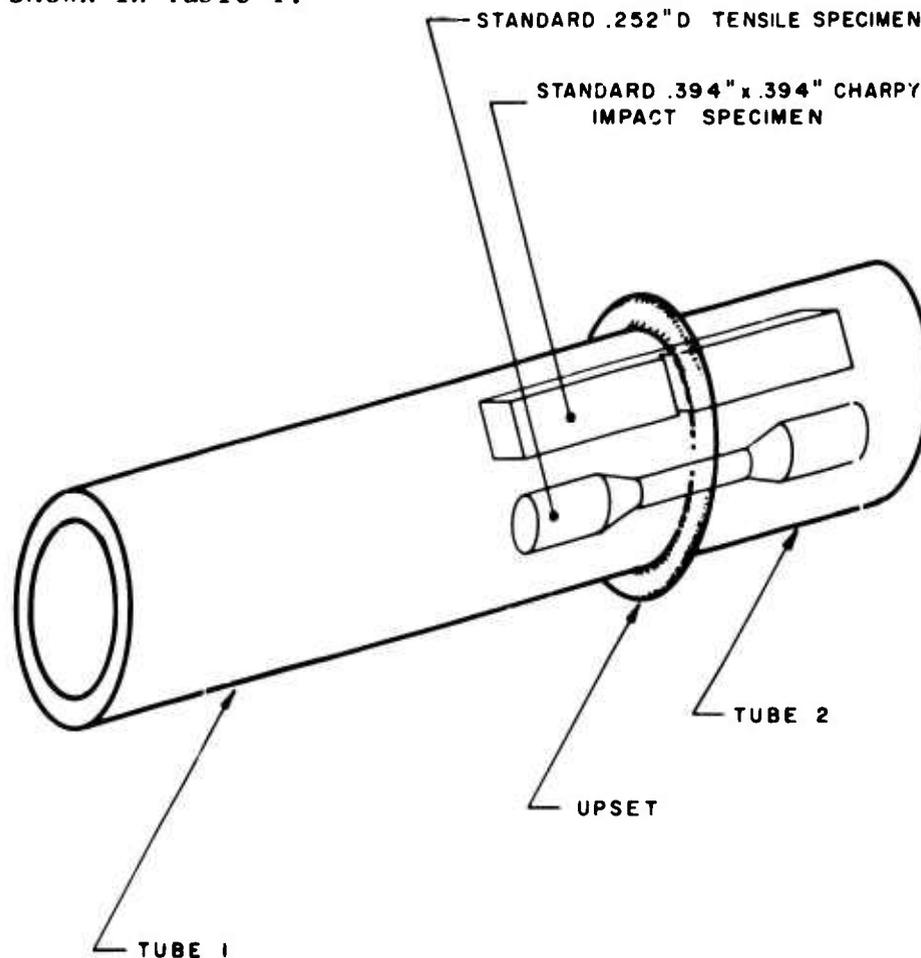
TYPICAL SPECIMEN LOCATION ON PRESSURE-WELDED TUBE
